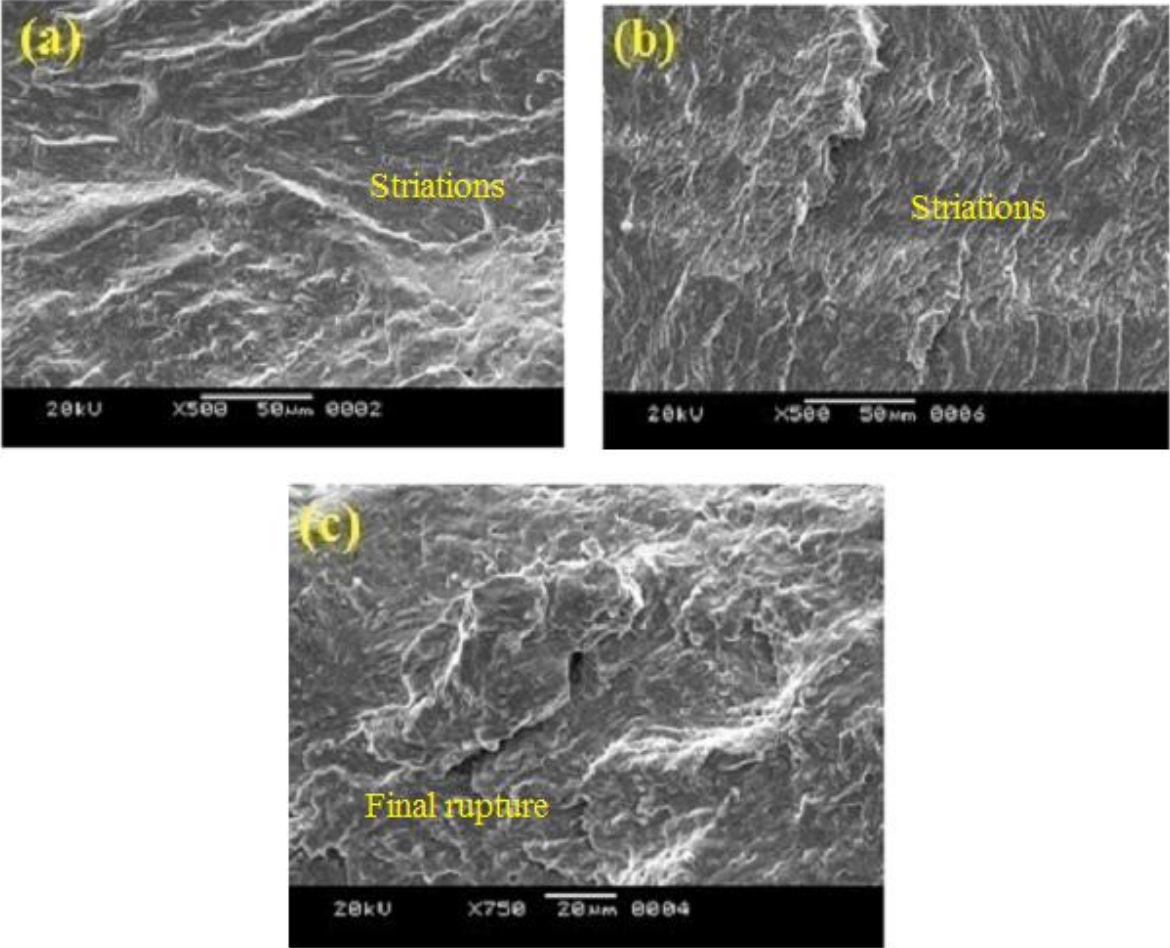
Fracture surface morphology of welded joint at 184.1MPa (a) crack initiation (b) crack propagation and (c) rapid crack growth before rupture
